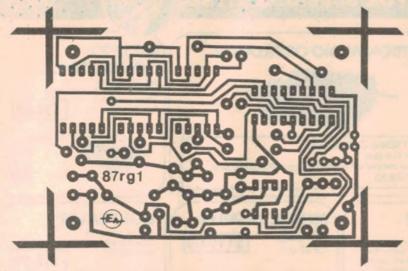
actual size PCB artwork. The board is coded 87rg1 and measures 82 x 55mm.
